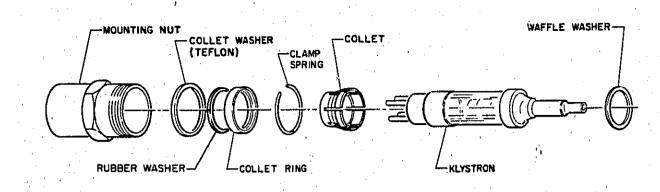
Exploded View of Klystron Mounting Parts (620B)
